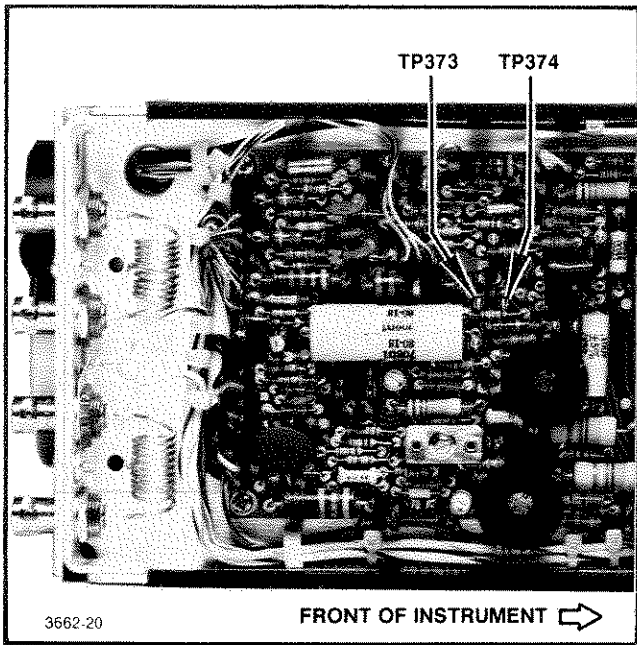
Partial view of the Main board, showing locations of TP373 and TP374 near the rear of the board.
